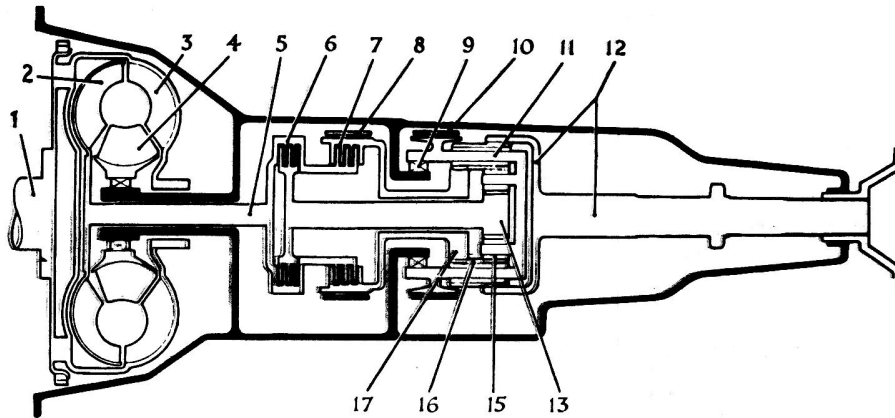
SECTIONAL VIEW OF THE MAIN MECHANICAL COMPONENTS
